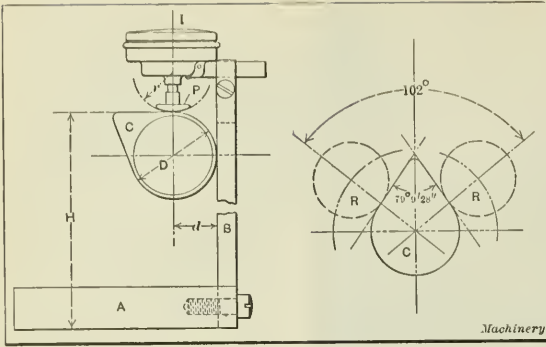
Method of using Dial Test Indicator for inspecting Gas Engine Cams
